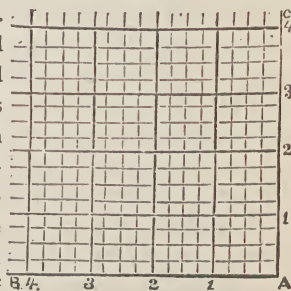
GRADUATED BOARD FOR GLASS CUTTING.
